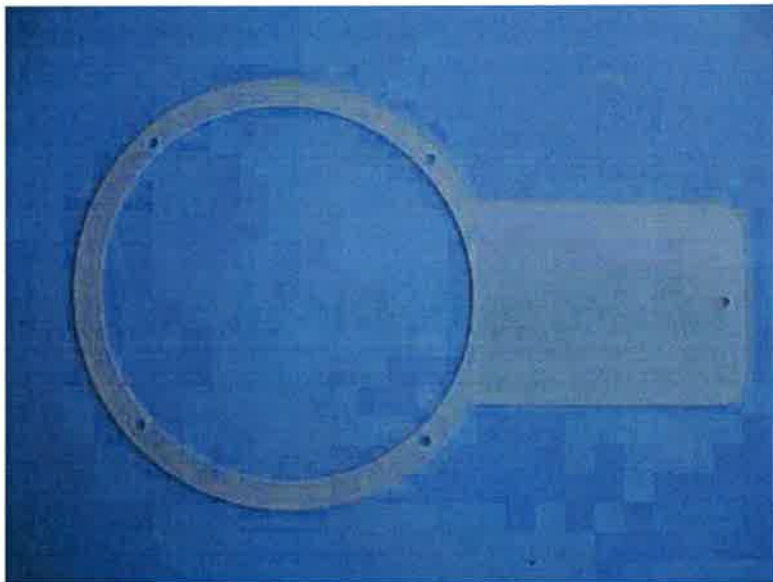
seal 00-419155-01 for skin space holder with Laser X-ray
